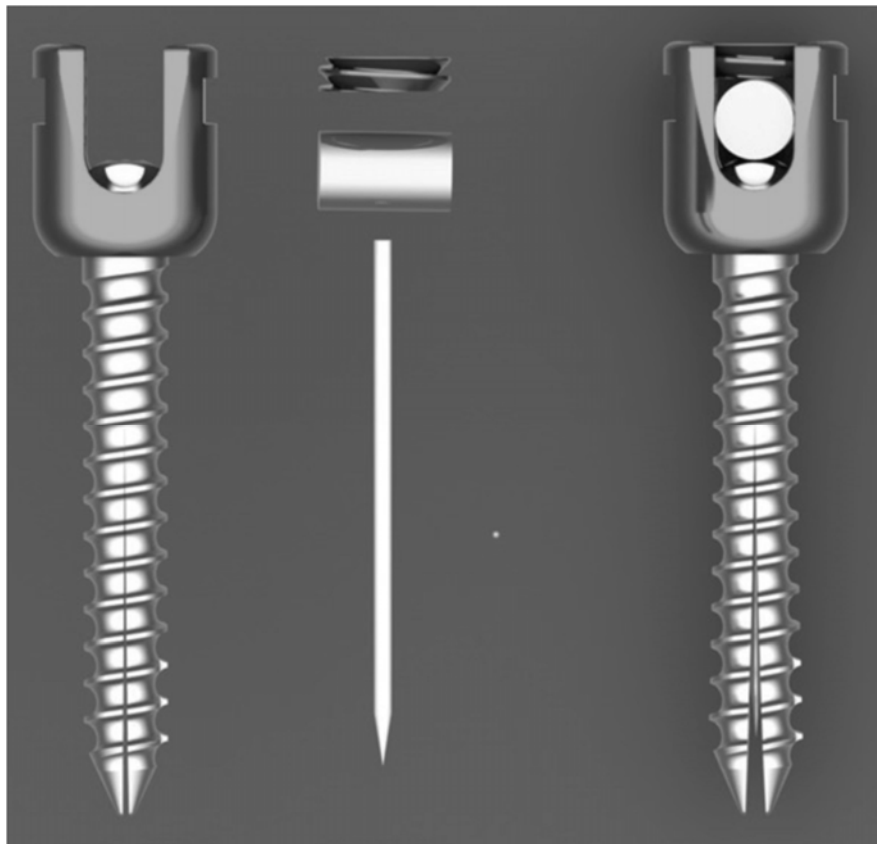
Schematic illustration of expanding mechanism of expandable screw
